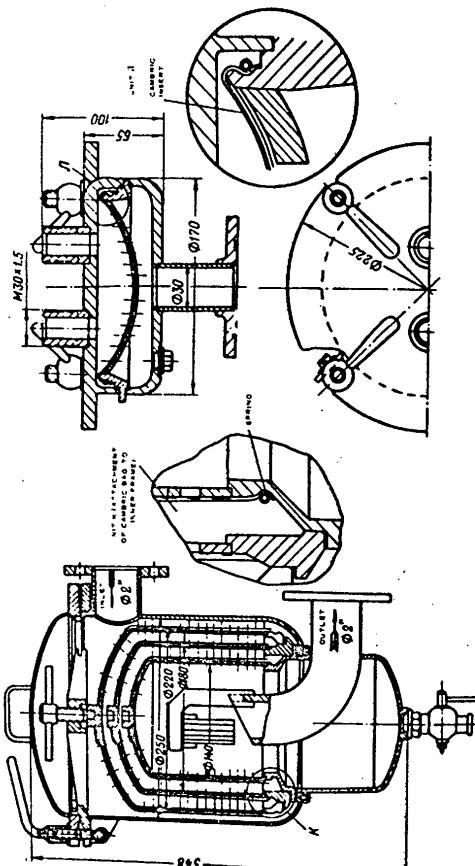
APPARATUS FOR FLUSHING ENGINE WITH MOTOR OIL.
